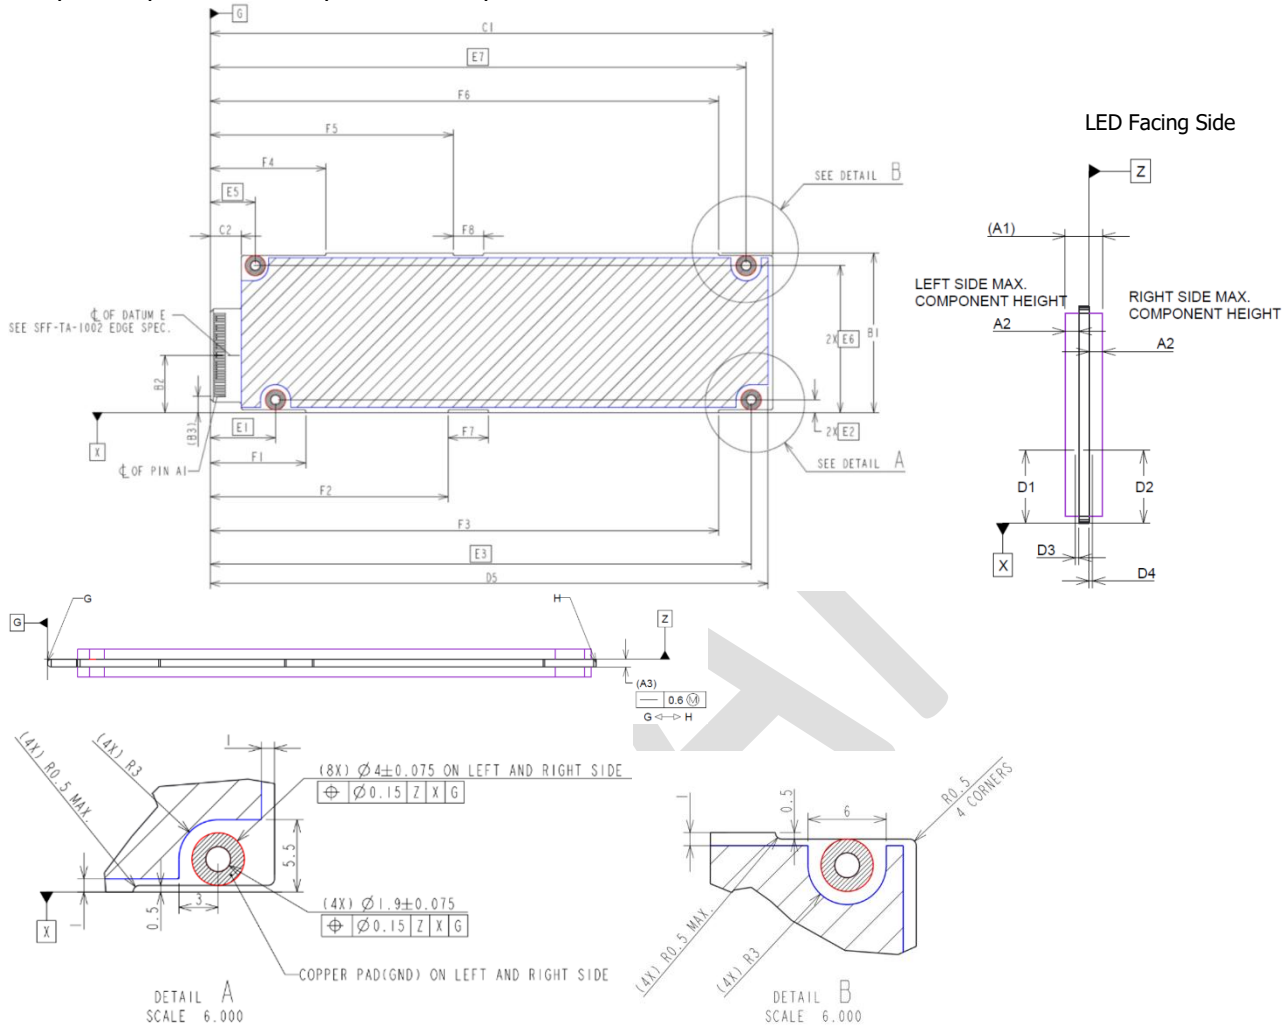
5.9 mm Thick 1U Short Form Factor drawing
